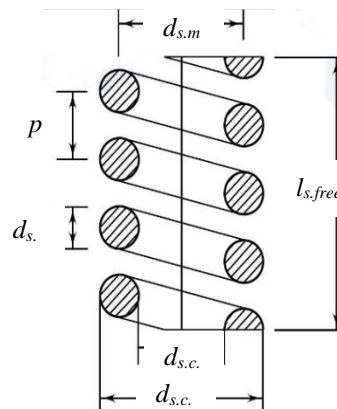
Dimensions of closed coiled helical spring (CCHS)
